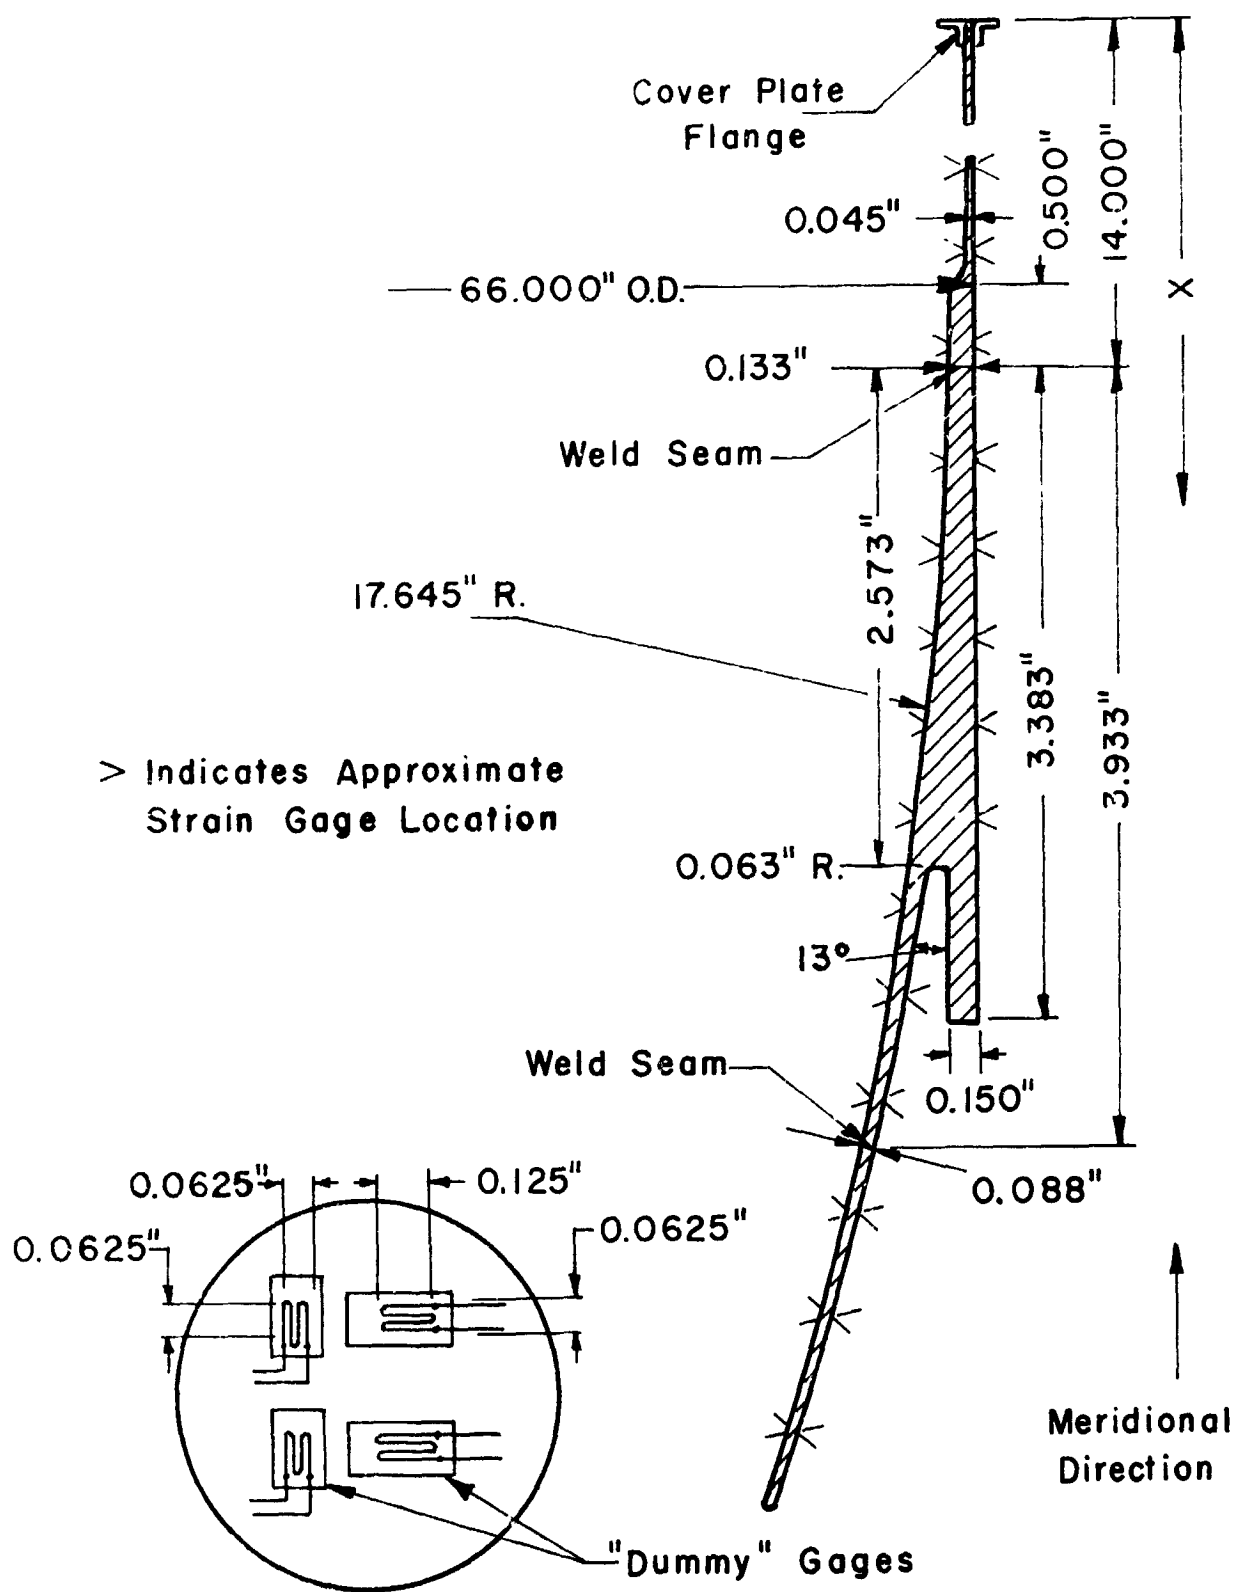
Dimensioned Sectional View of Y-Ring Showing Strain Gage Spacing
